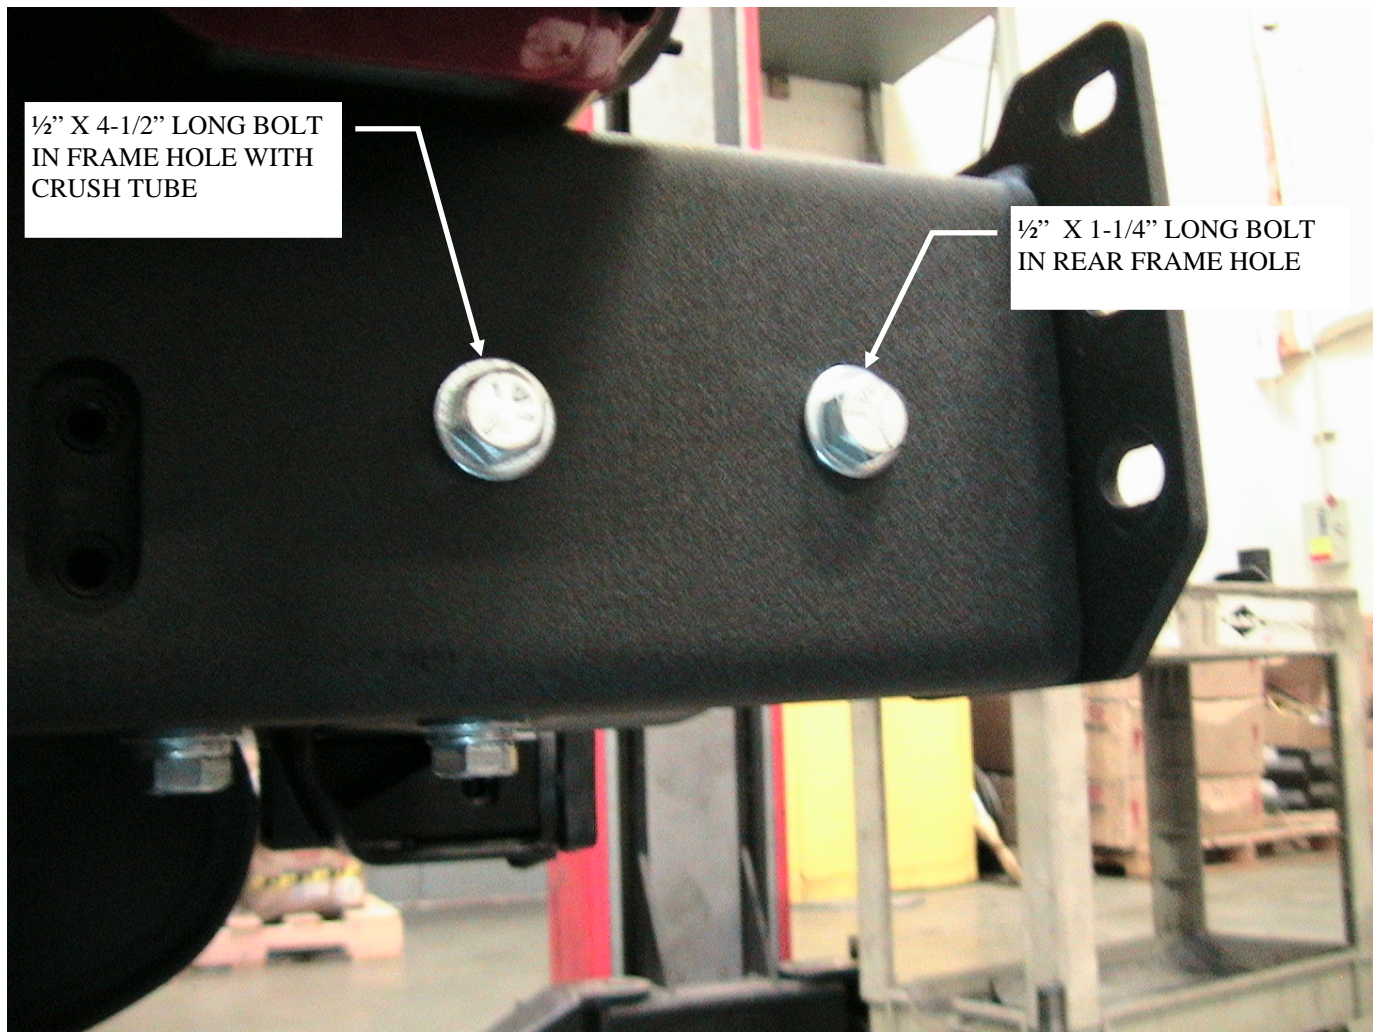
Driver's Side Frame Bracket and Bolt locations.
